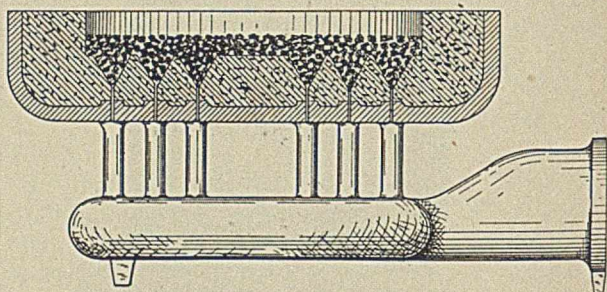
MODIFICATION OF TUBULAR TYPE COOK STOVE TOP BURNER FOR QUICK INITIAL HEATING
